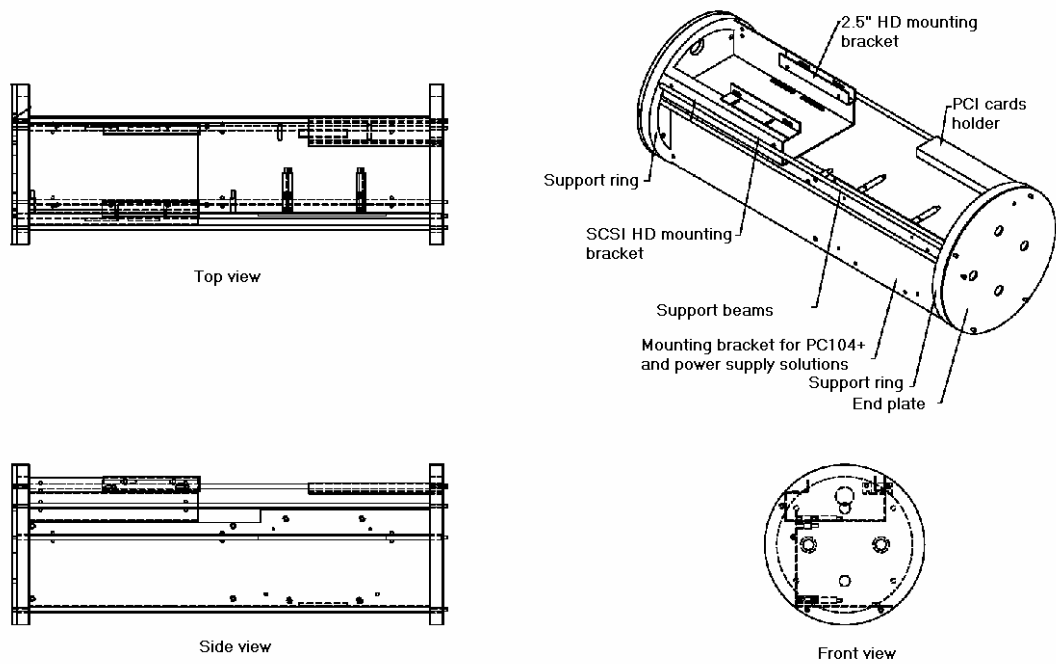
Mechanical drawing of the internal electronics cage and assembled electronics package
